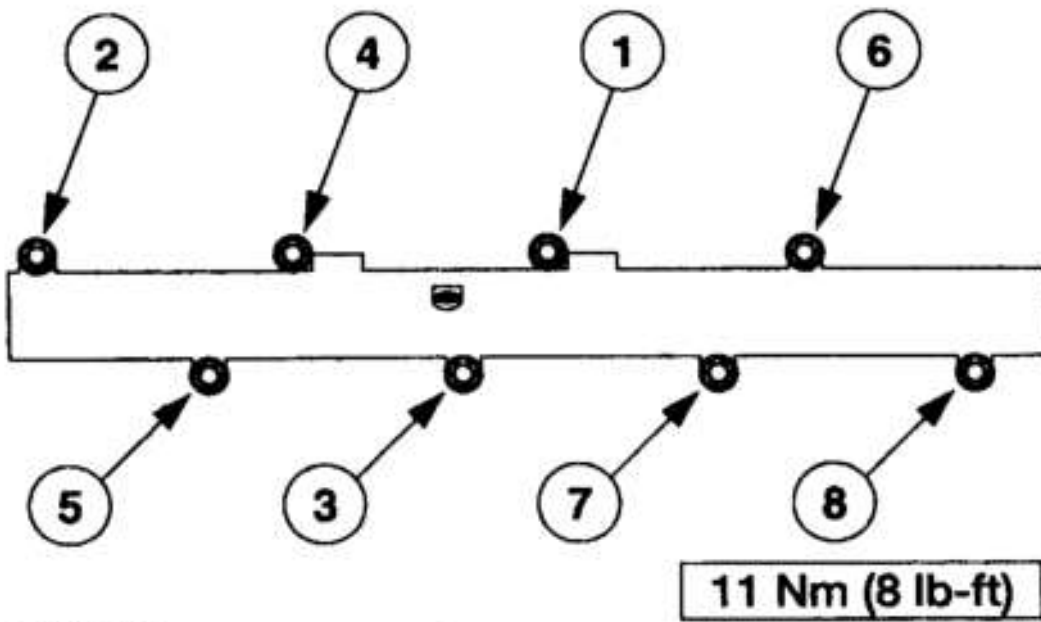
Lower Crankcase Main Bearing Mounting Bolt Tightening Sequence
